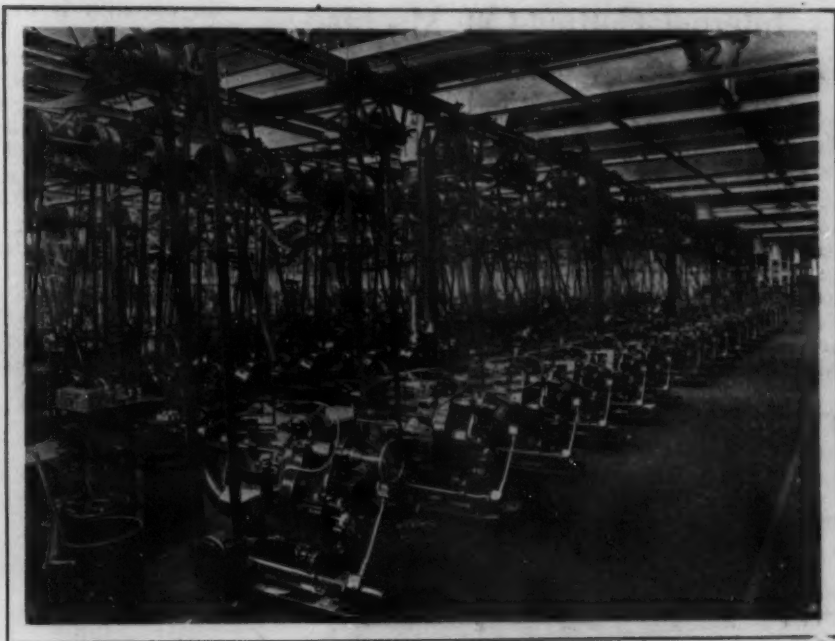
A Group of Gear Cutting and Gear Generating Machines
